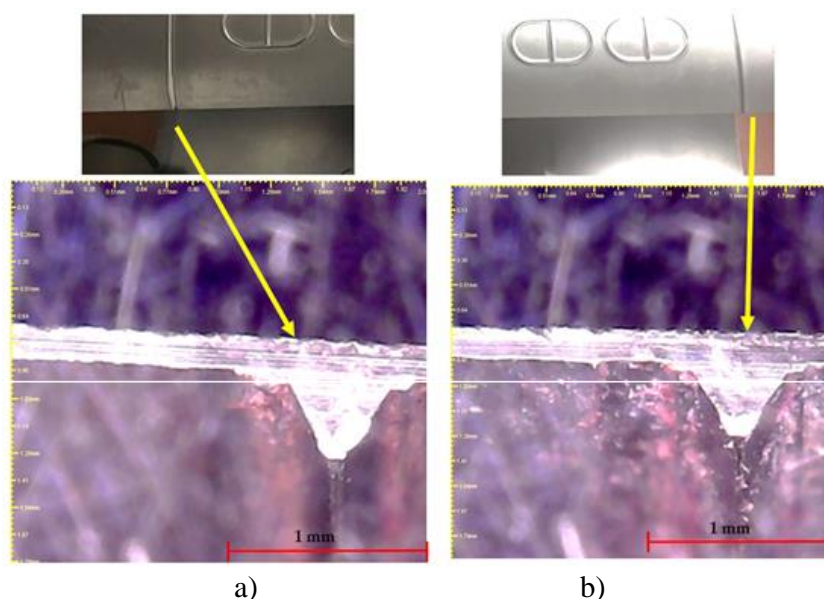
M3 die-cut: a) left side knife wear; b) right side knife wear.
